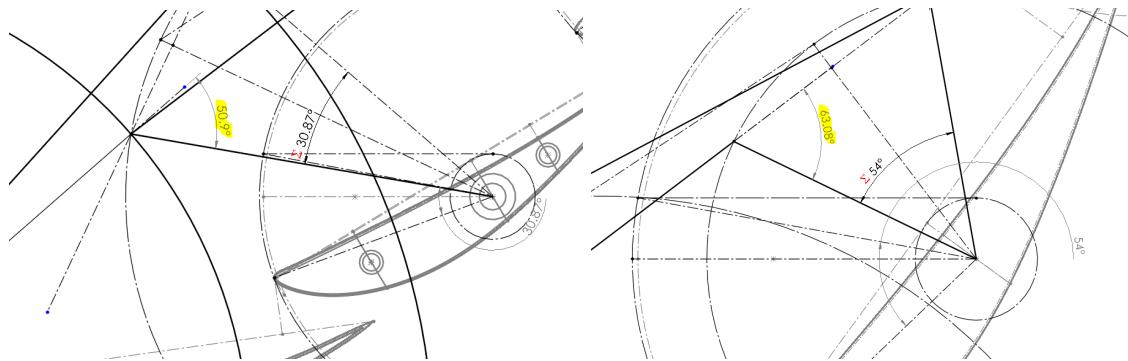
SolidWorks CAD of Mechanism Kinematic Sketch
